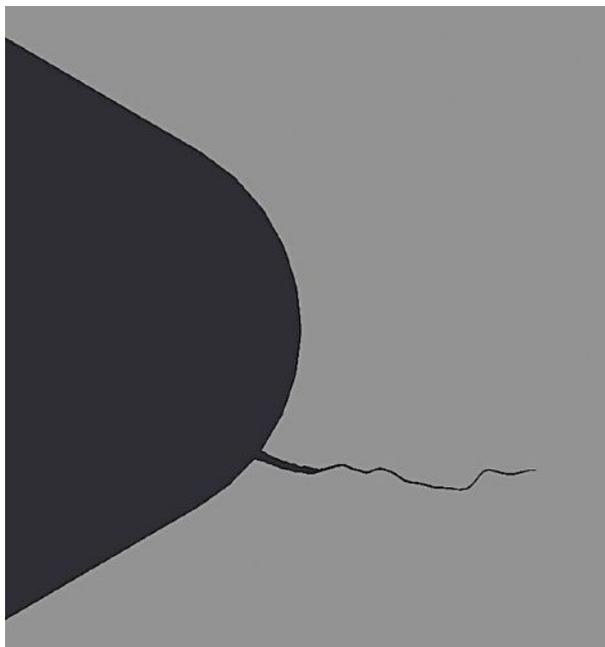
Fatigue crack initiated near the thread root in a bolt (image courtesy of Matrix Engineering Consultants).
